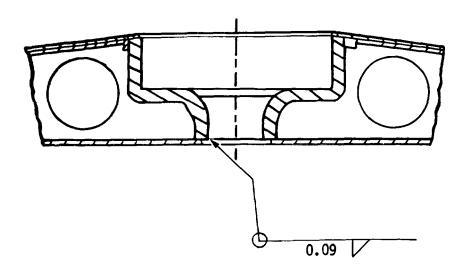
Repair welding procedure for cracks in bottom plate 12008513 to support 12008501.
